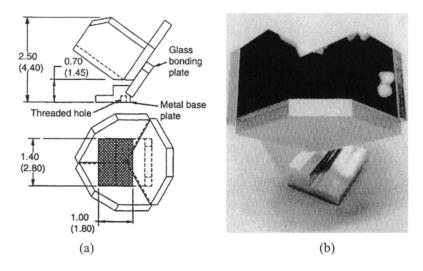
Schematic (a) and photograph (b) of a HCR bonded to a metal baseplate. Dimensions apply to models with ODs of 2.50 and (4.0) in. [6.35 and (10.0) cm]. (Courtesy of PROSystems, Inc., Kearneysville, WV.)
